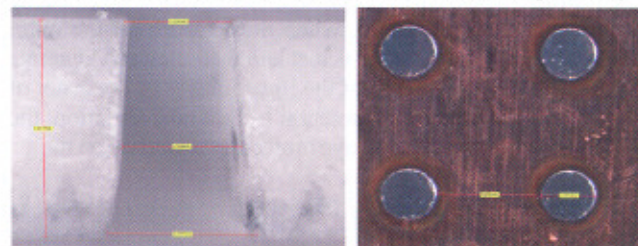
Machining of Ceramic block Holes drilled in copper foil
